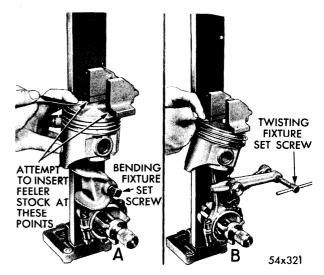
Checking Connecting Rod and Piston For Alignment (Typical)
